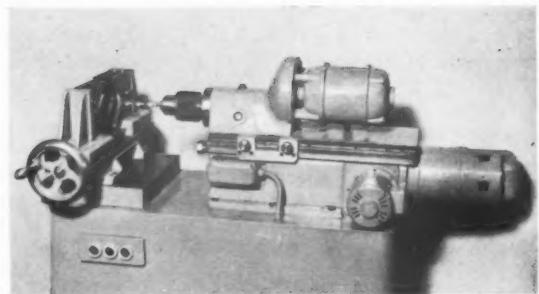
(a). Simple one-way horizontal machine with special work fixture.
